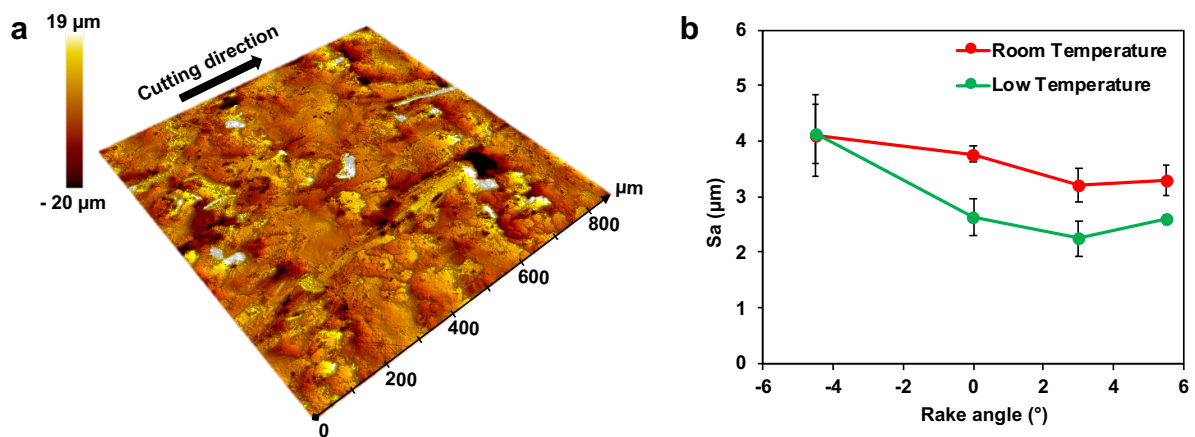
(a) typical topographic image of the machined surfaces of unidirectional flax fiber composites at the relevant scale. (b) Arithmetic mean surface roughness of the machined surfaces of unidirectional flax fiber composites at the relevant scale
